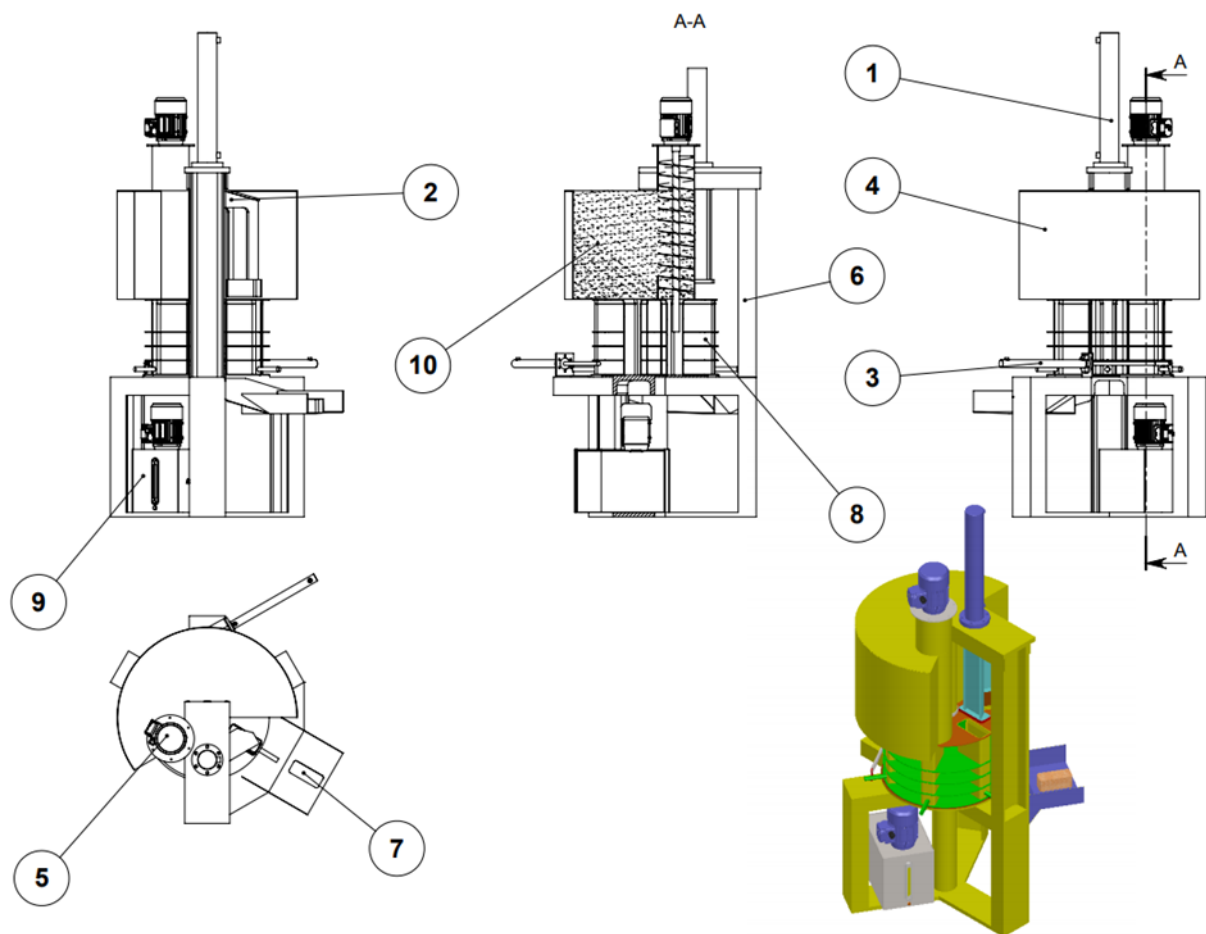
Example of making the hydraulic press of parallelepiped-shaped briquettes
